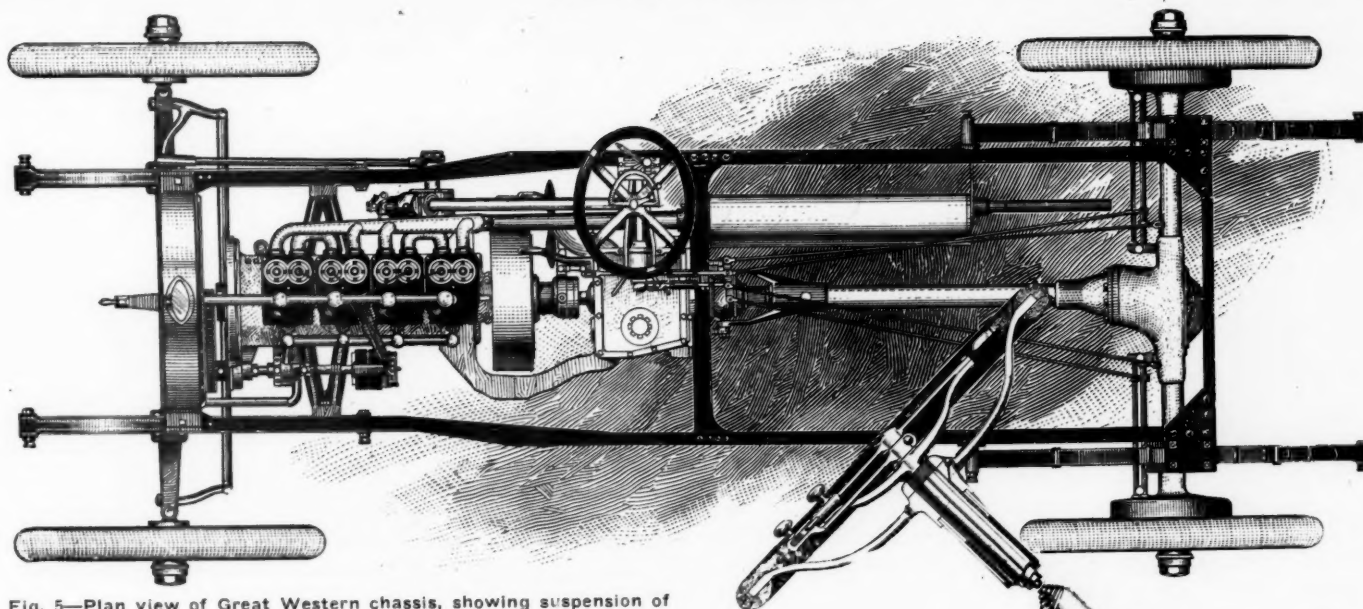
Plan view of Great Western chassis, showing suspension of motor and drive
